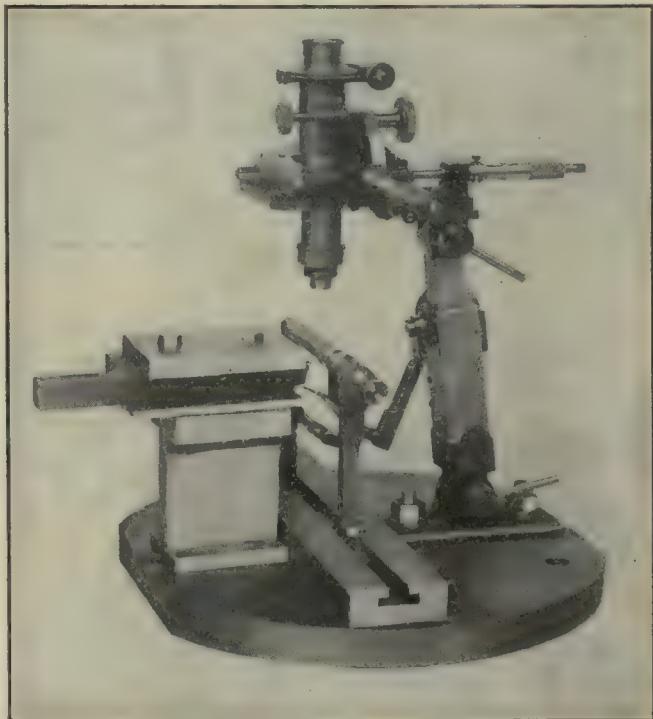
THE TOOL UNDER THE MICROSCOPE
